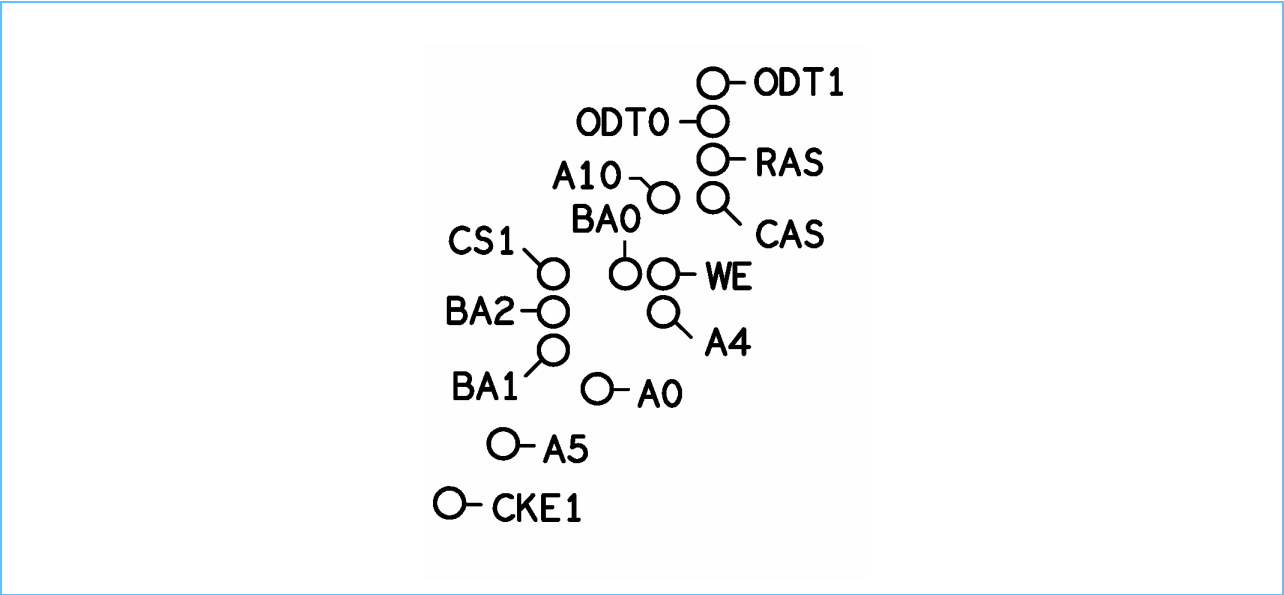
Test Point Identification (Raw Card Version E): Front Side View, Test Points Near the First DRAM
